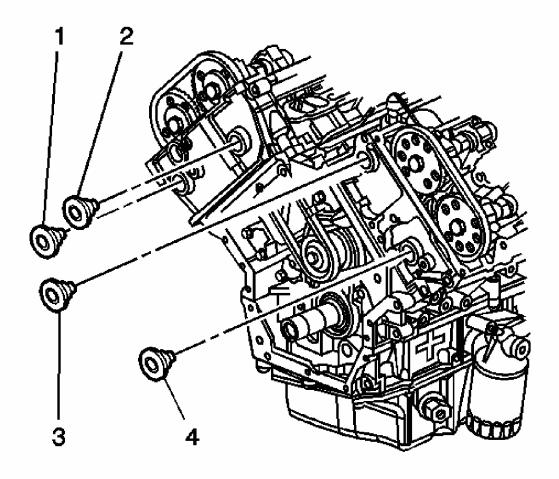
Locating Camshaft Drive Chain Shoe Access Plugs On Front Of Engine Courtesy of GENERAL MOTORS CORP.
